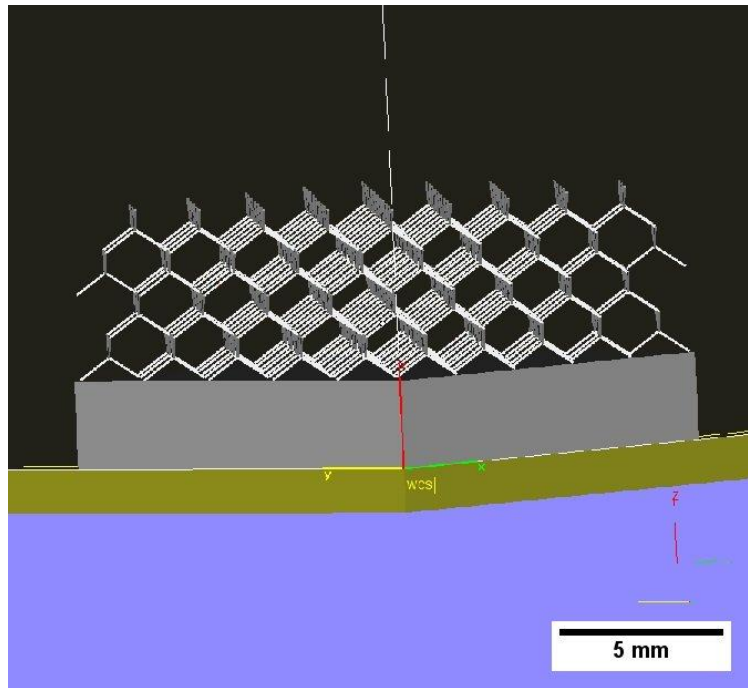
The CAD model of the prototype shown in Netfabb.
